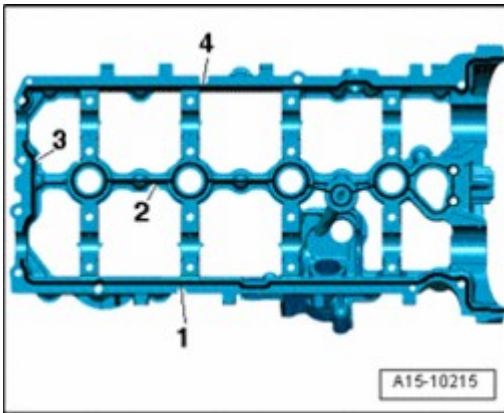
Laying New Seal In Guide Frame Groove & Applying Sealant Beads On Clean Guide Frame Sealing Surfaces
